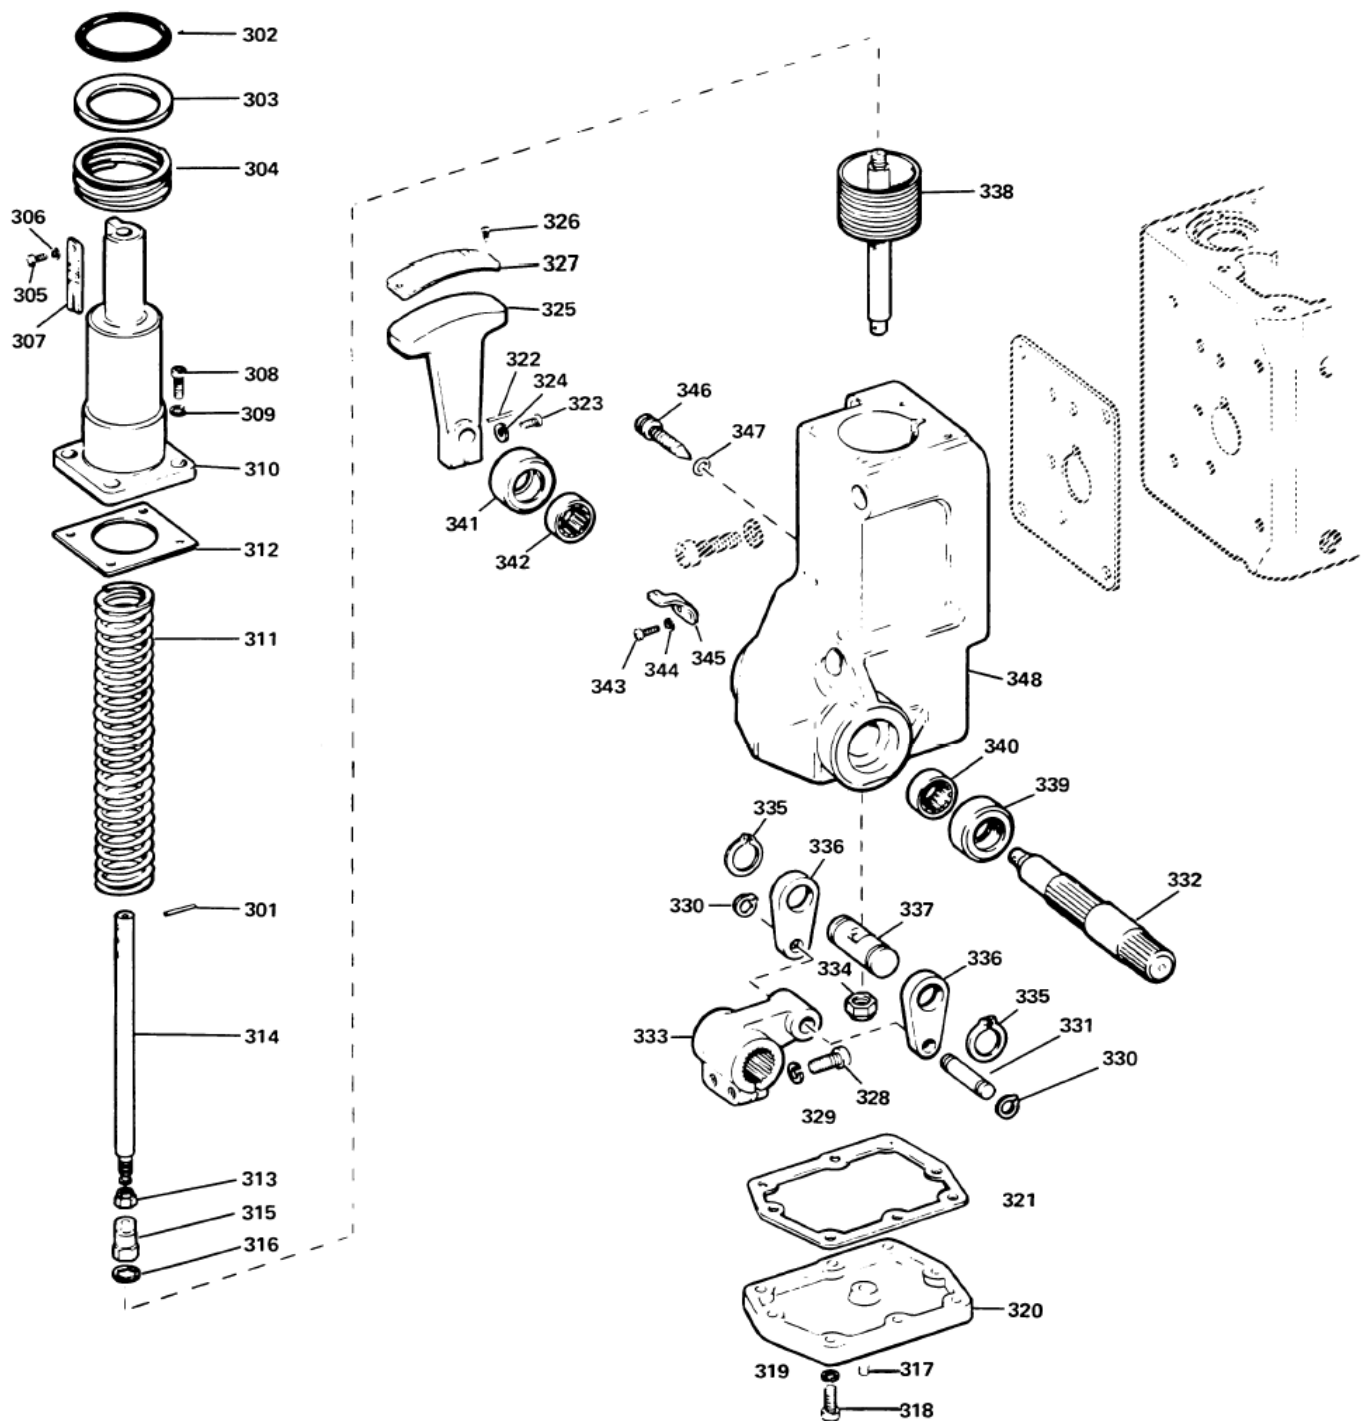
Exploded View of Spring-Loaded Power Cylinder
